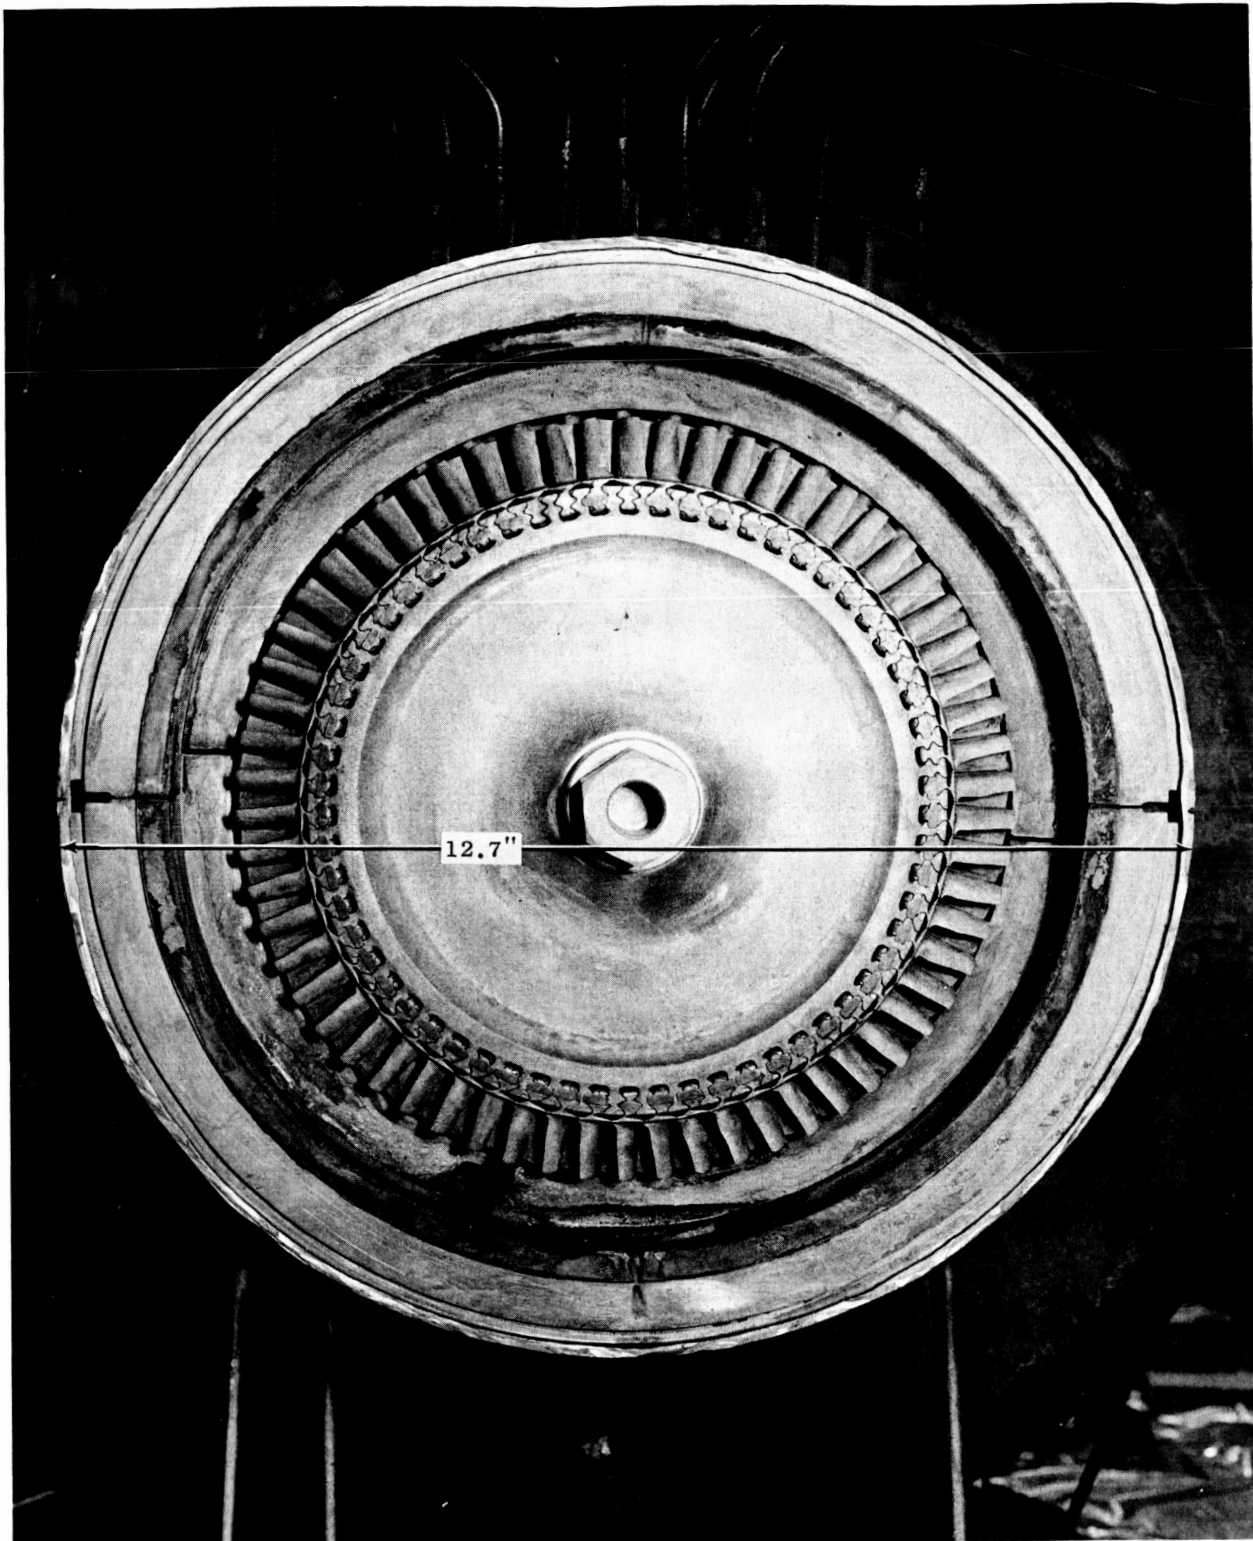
Turbine First Stage Rotor Following Removal of Inlet Duct.
